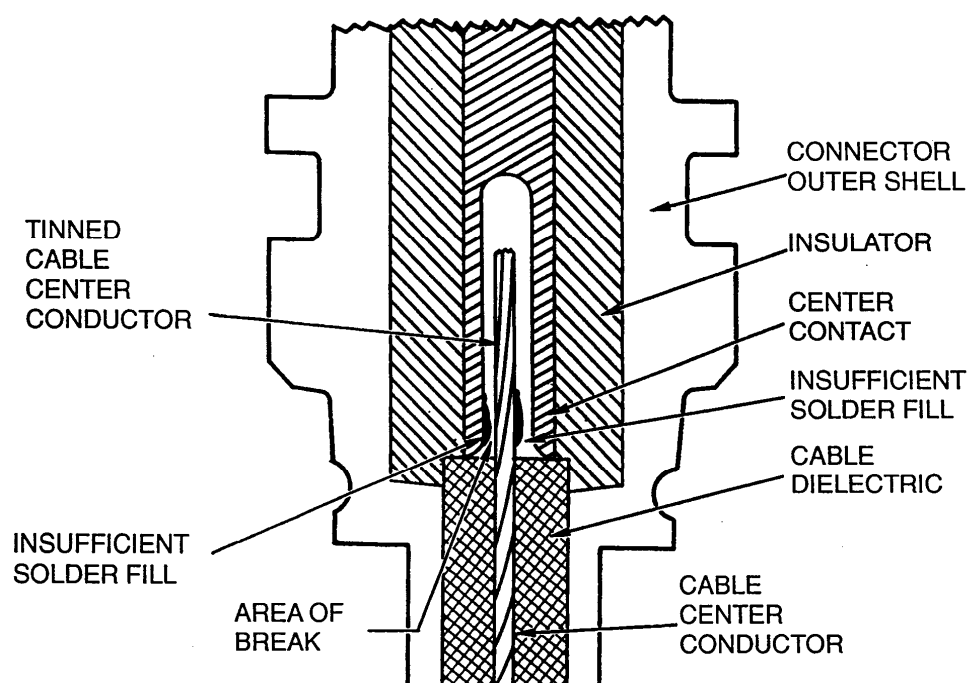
Broken Solder Joint Caused by Insufficient Solder Fill
